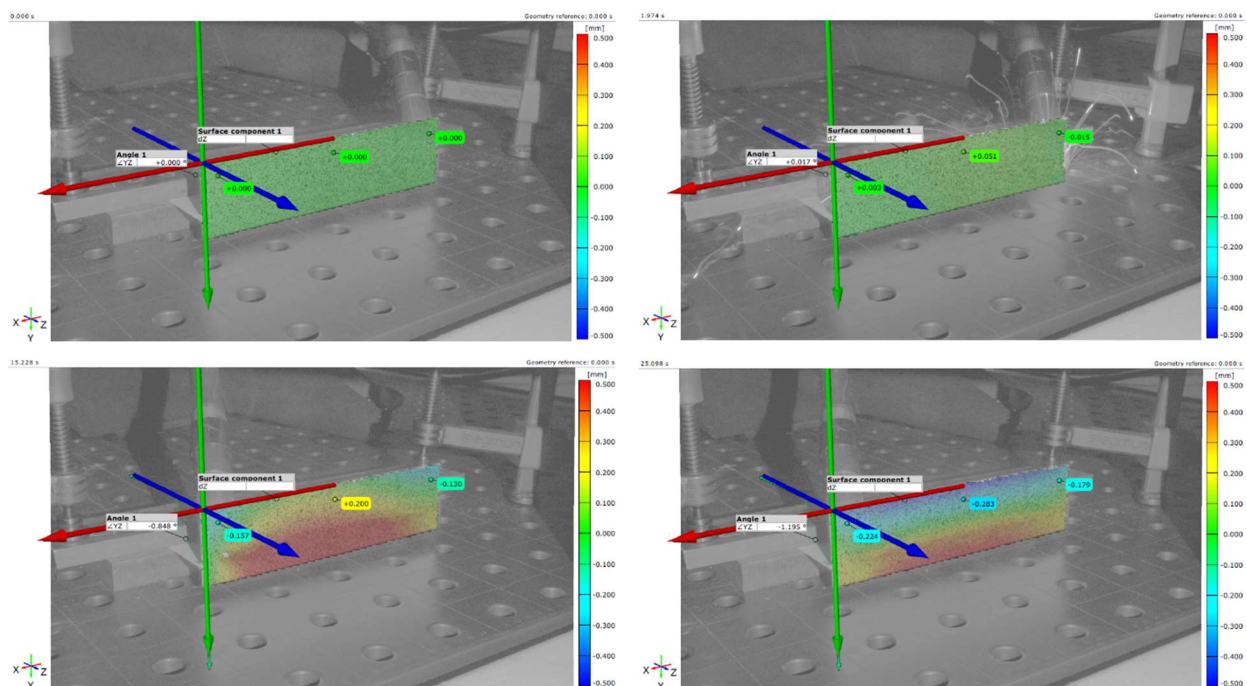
Colour map of deviations along the axis direction and angular deformation of specimen No. 3B; a) reference scan (t: 0.00 s); b) beginning of welding (t: 1.97 s); c) end of welding (t: 15.23 s); d) cooling the weldment (t: 25.10 s)
